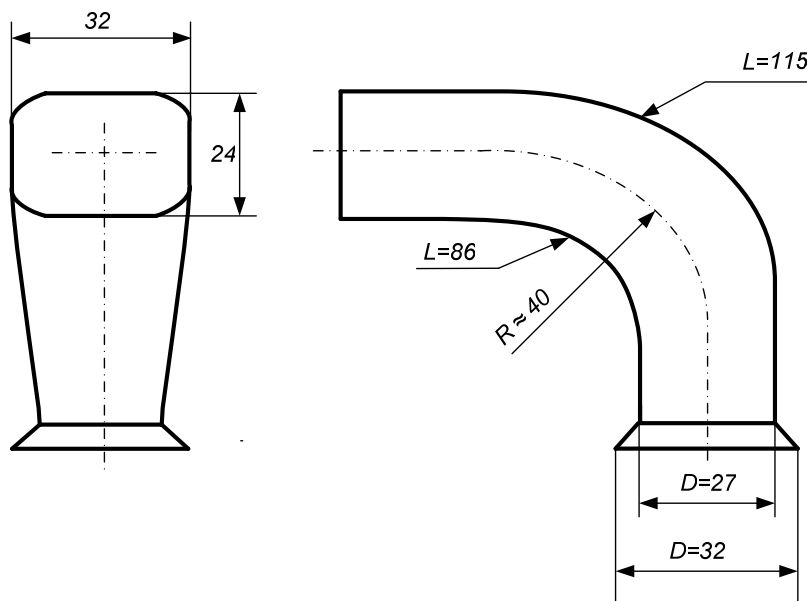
The geometry of the diesel engine exhaust port. All dimensions are in mm.
